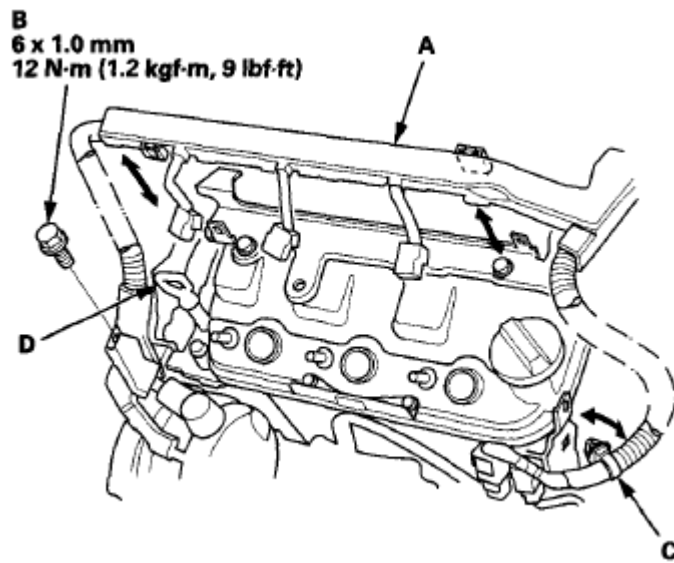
Installing Harness Holder To Bracket With Torque Specifications
